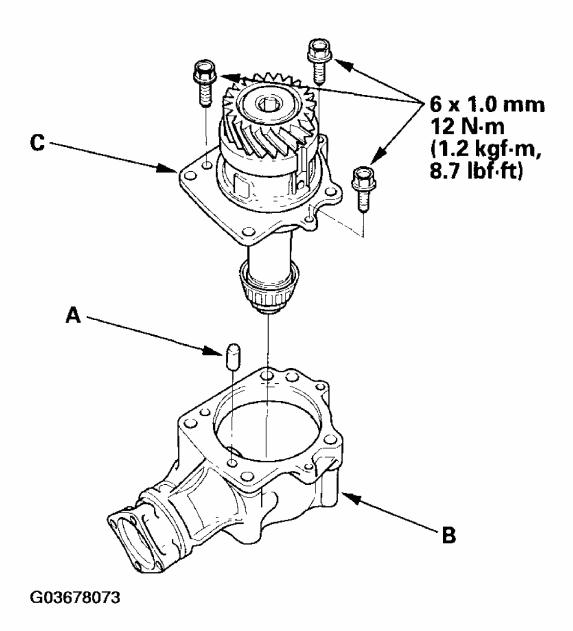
Installing Dowel Pin In Transfer Housing And Torque Specifications Courtesy of AMERICAN HONDA MOTOR CO., INC.
